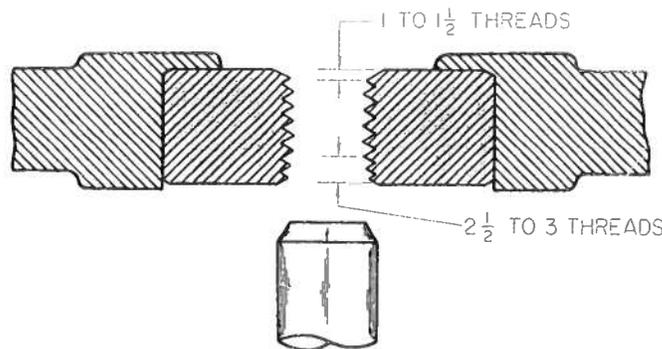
The starting side of the threading die has the most tapered threads.
